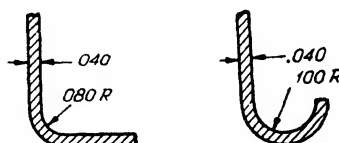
Minimum hot bending radius for 90° and 180° bends.
